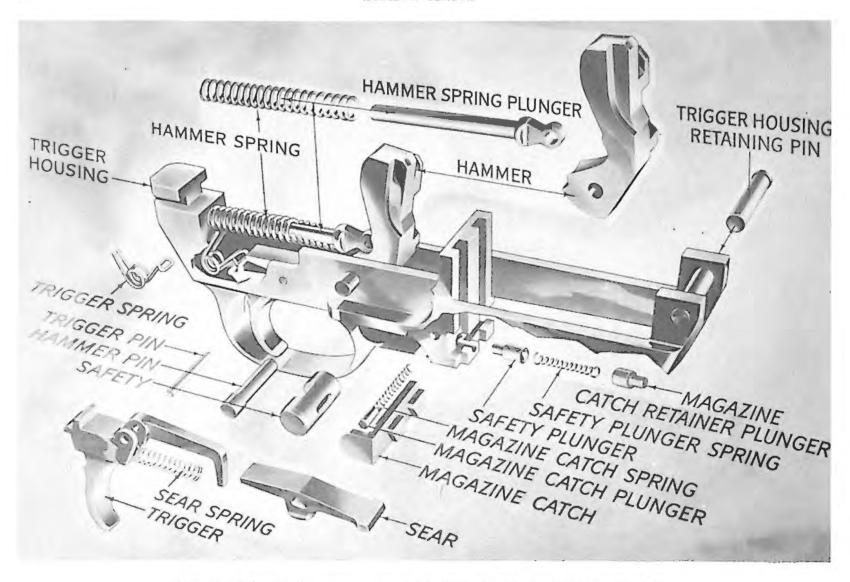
Trigger housing assembly, U.S. carbine, caliber .30, M1.
